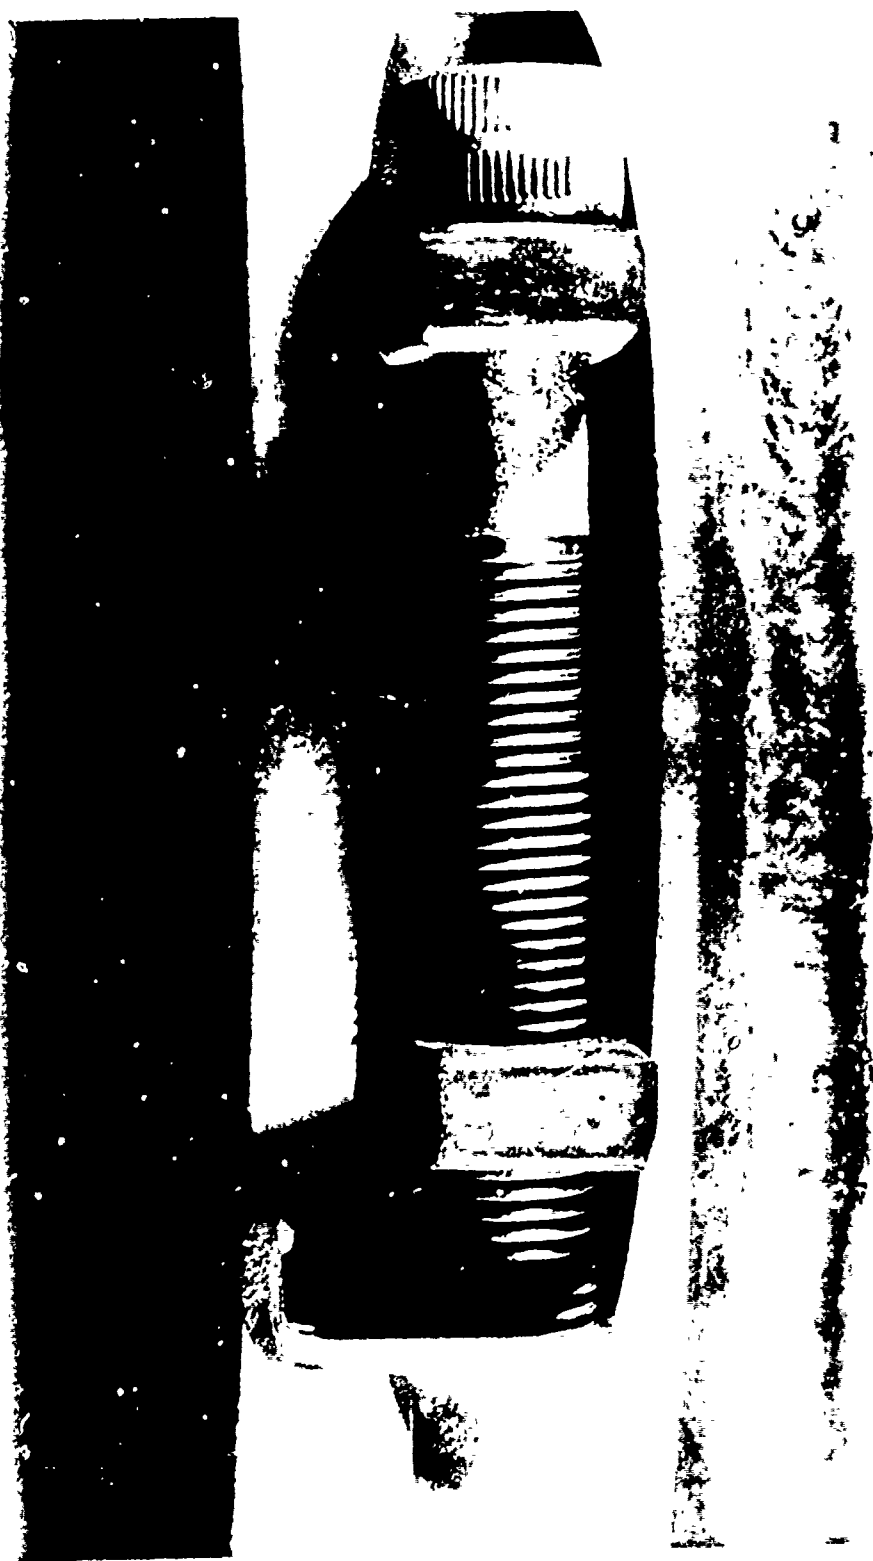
Quick-Attach Bolt and Clamp Mechanism
